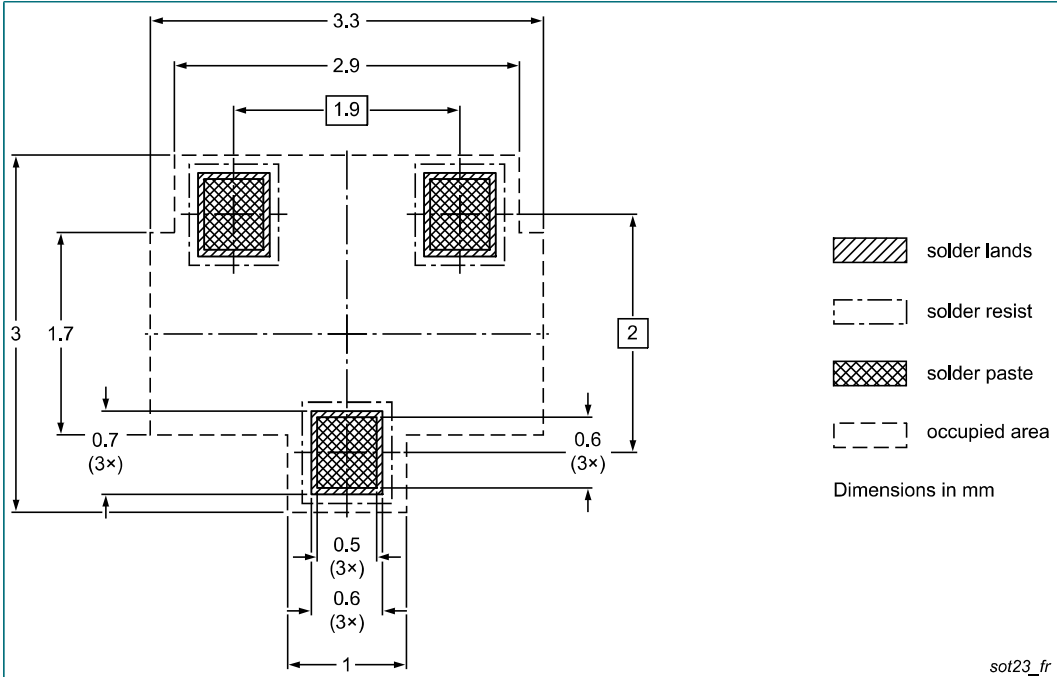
Reflow soldering footprint for SOT23 (TO-236AB)
